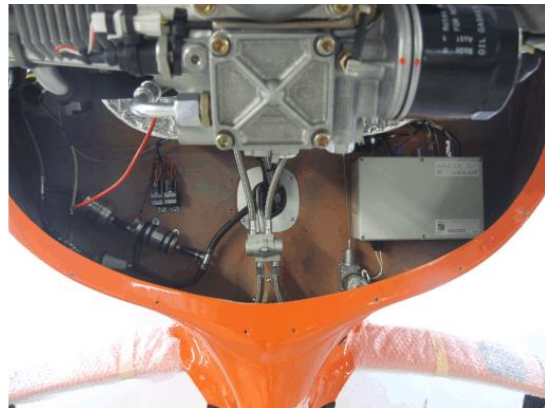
Rear Wall 'Installation Wall' (Fire Wall removed)
